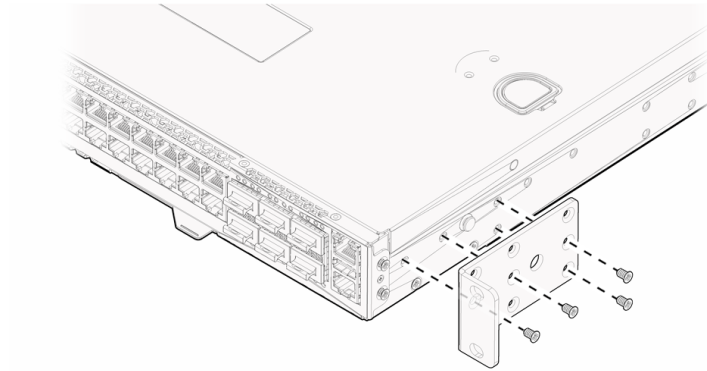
Flush-Mount: Attaching Short Mounting Brackets
